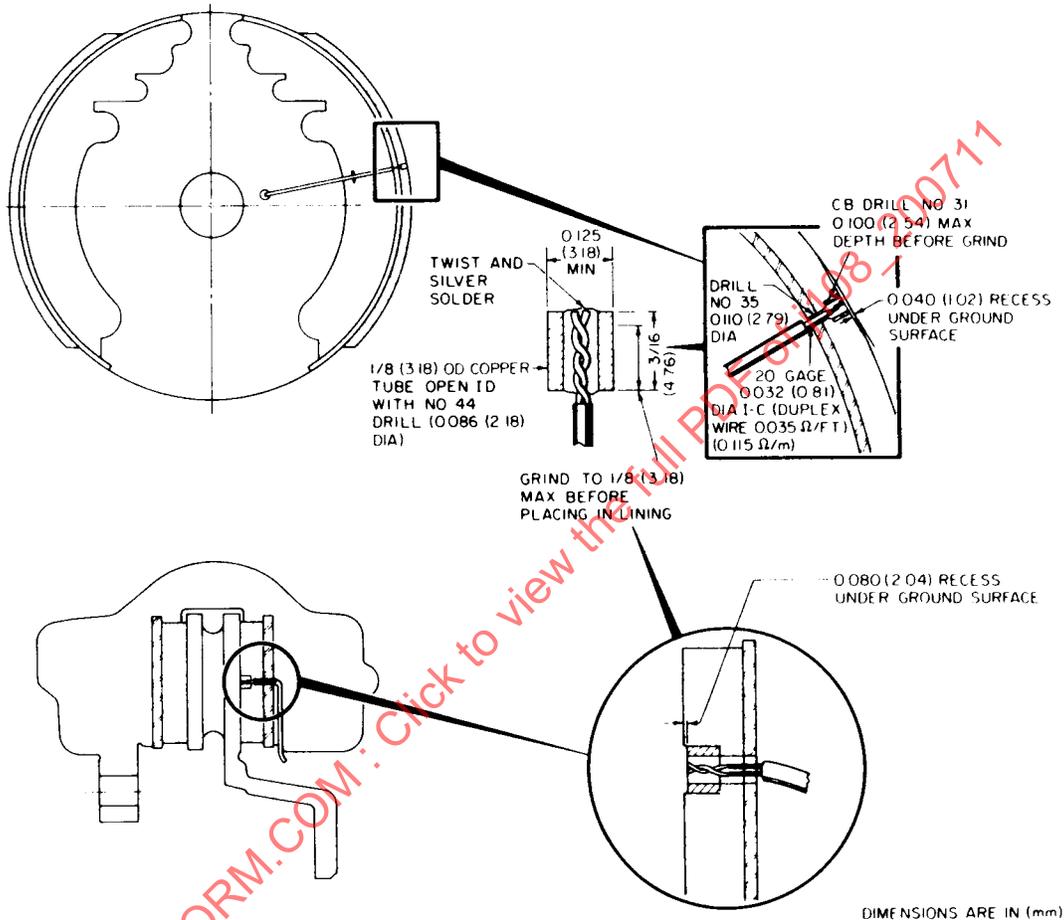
TYPICAL PLUG TYPE THERMOCOUPLE INSTALLATION
